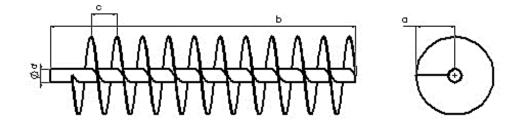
Conceptual 2D drawing of screw conveyor
